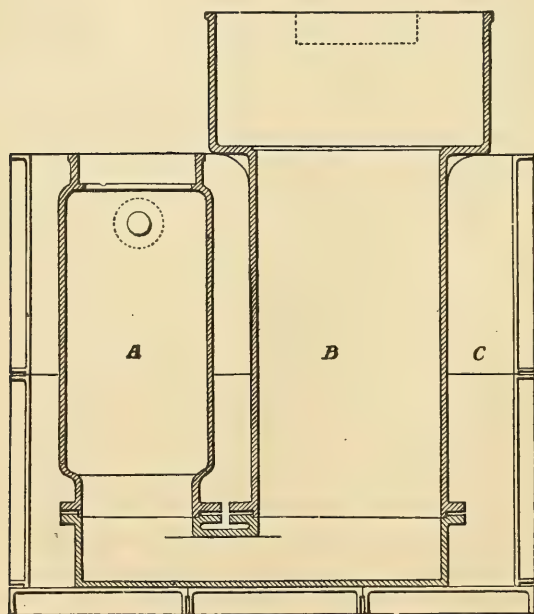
Air Pump and Condenser without Foot Valve contained in a cast-iron Tank.
